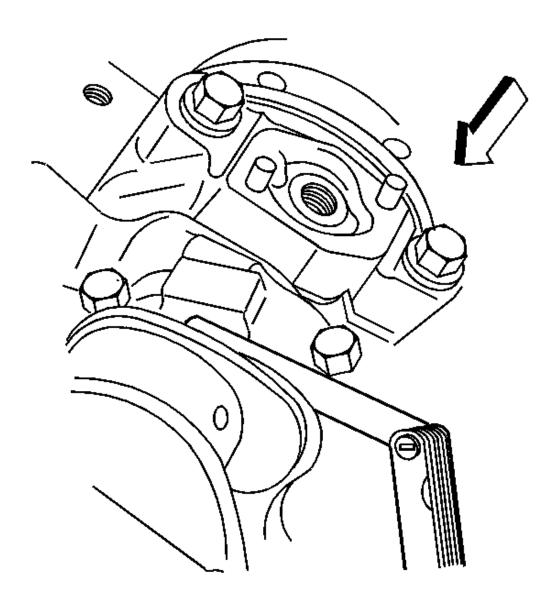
Installing Connecting Rod Components Courtesy of GENERAL MOTORS CORP.
